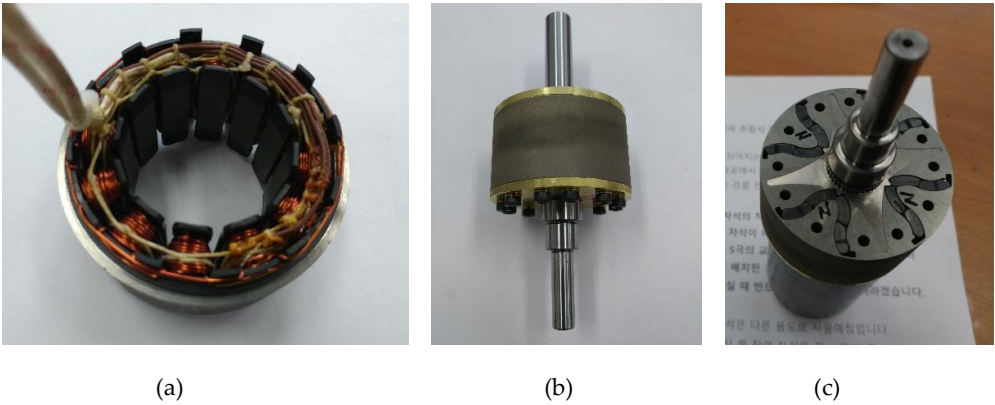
Prototype of the optimal FCPM model: (a) stator assembly, (b) rotor assembly, (c) the PM arrangement inside the rotor assembly.
